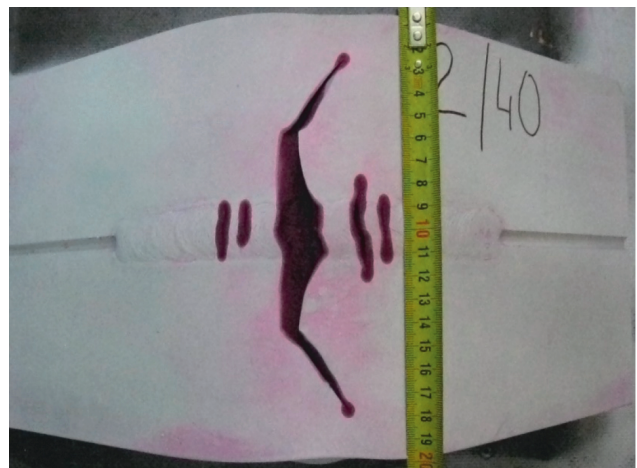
Crack-triggered penetrant test indications in the 40 mm thick specimen subjected to the bend test
